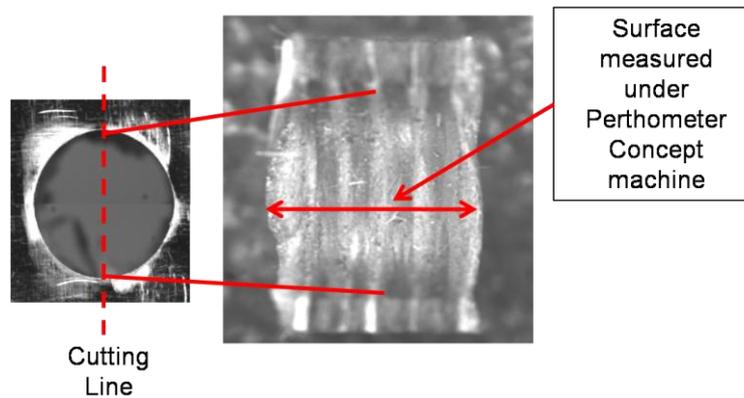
Technique to measure surface roughness of the drilled holes.
